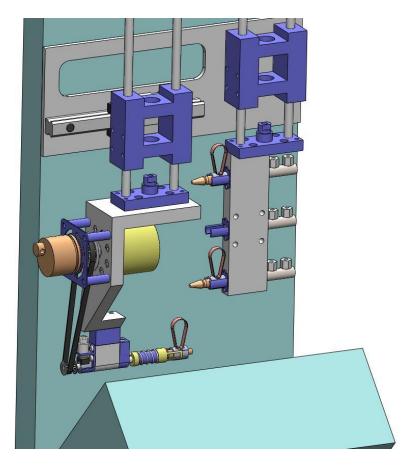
Illustration of the complete EDM-tool mounted on linear actuators.
